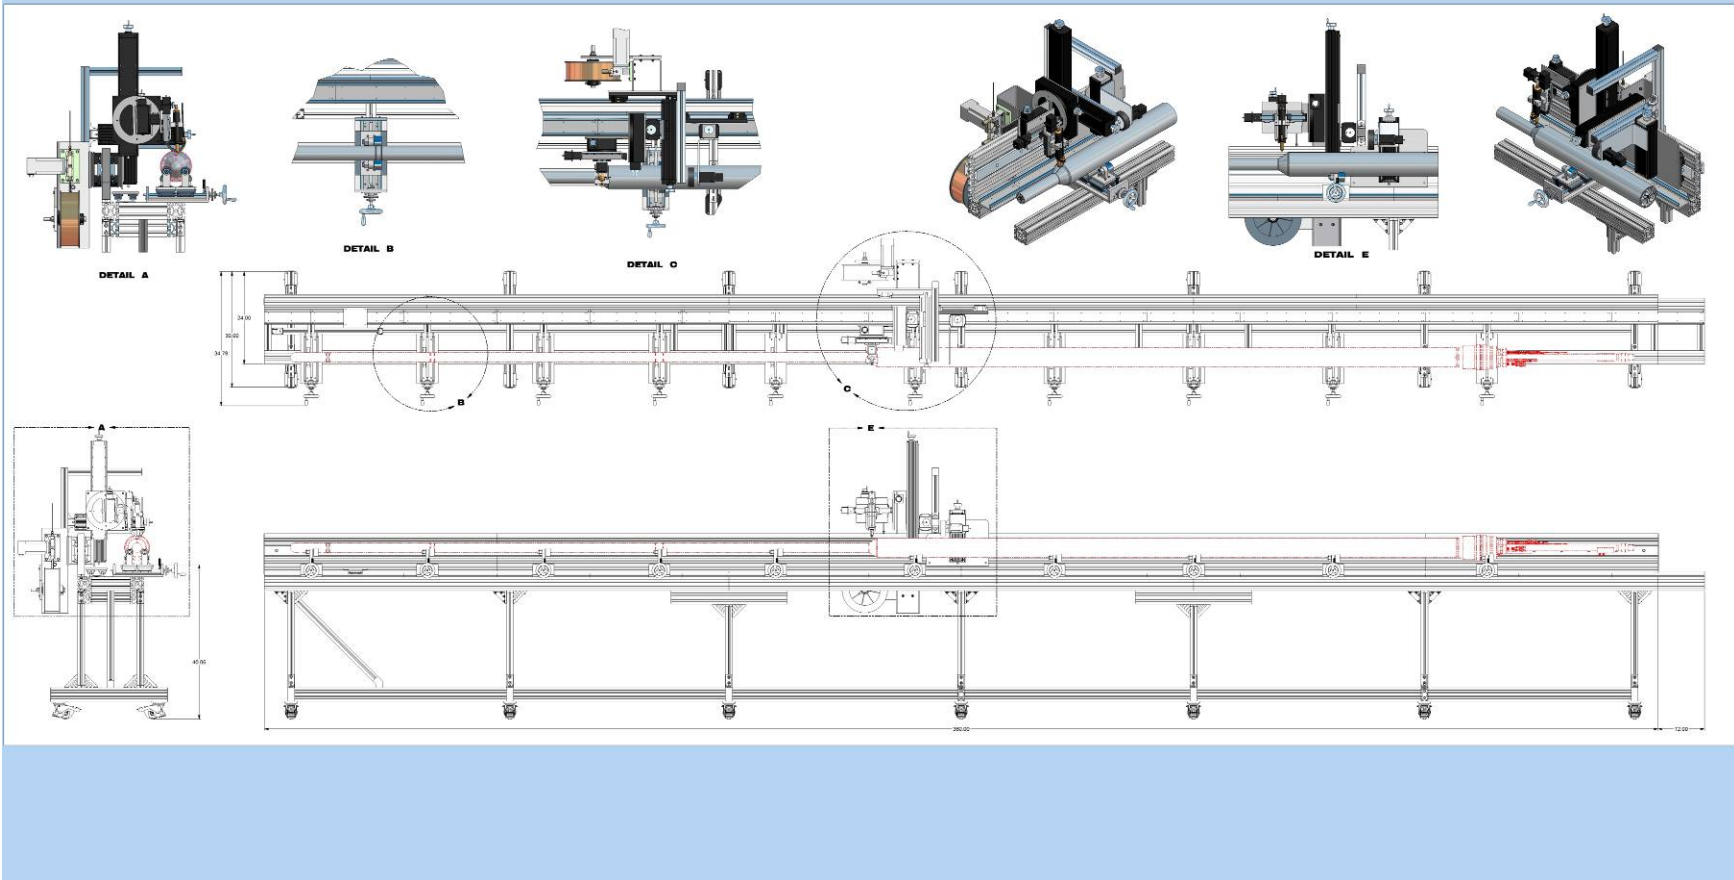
Sketch of the assembly table with weld head to assembly and weld the full size AGC 1 mockup capsule.
